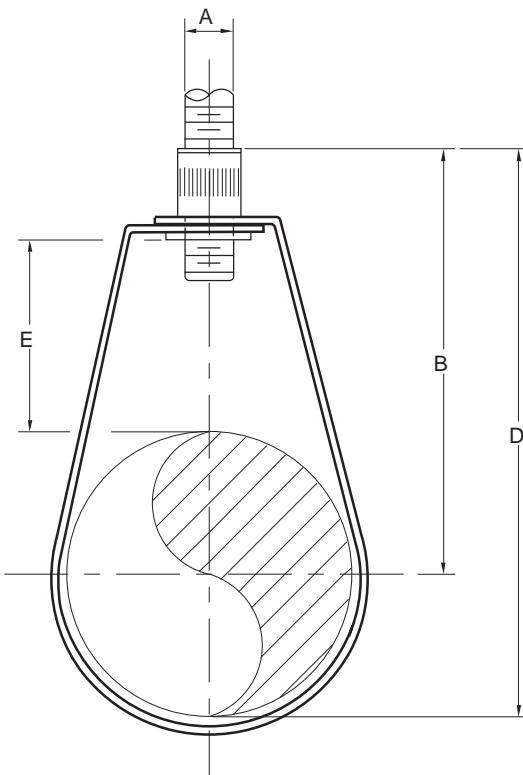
FP – NFPA ADJUSTABLE SWIVEL RING
